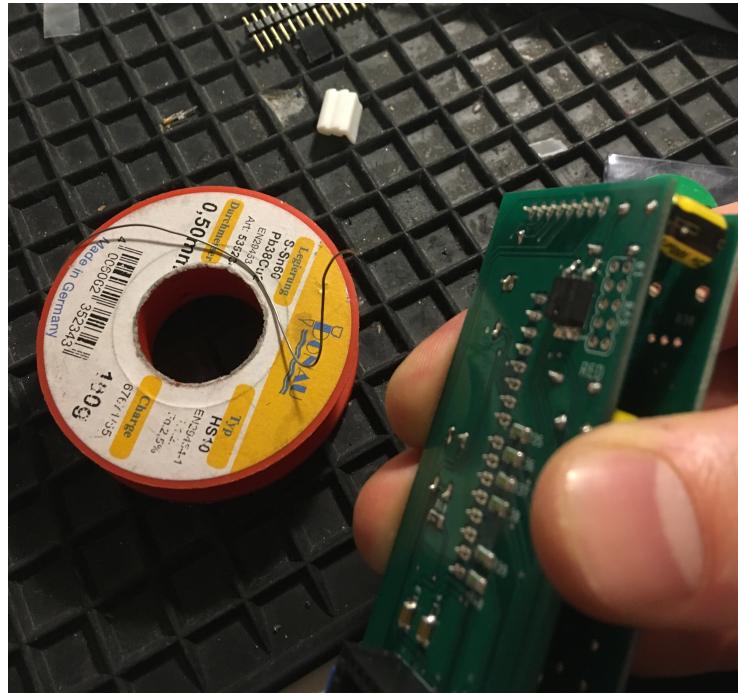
Now you bend the solder like shown and then you solder ONE pin on each header, on which PCB you solder one pin doesn't really matter, it's just to hold the headers in place
